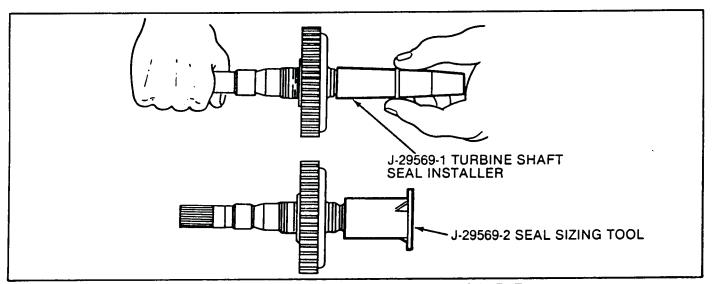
TURBINE SHAFT SEAL REPLACEMENT
